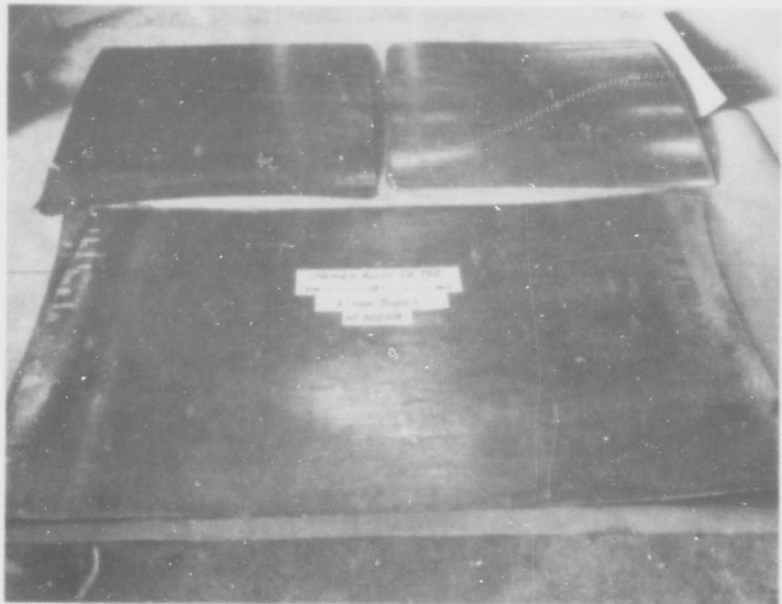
As-cold-rolled 1/8-inch thick Cb-752 sheet, Heats 52206 and 52208.
